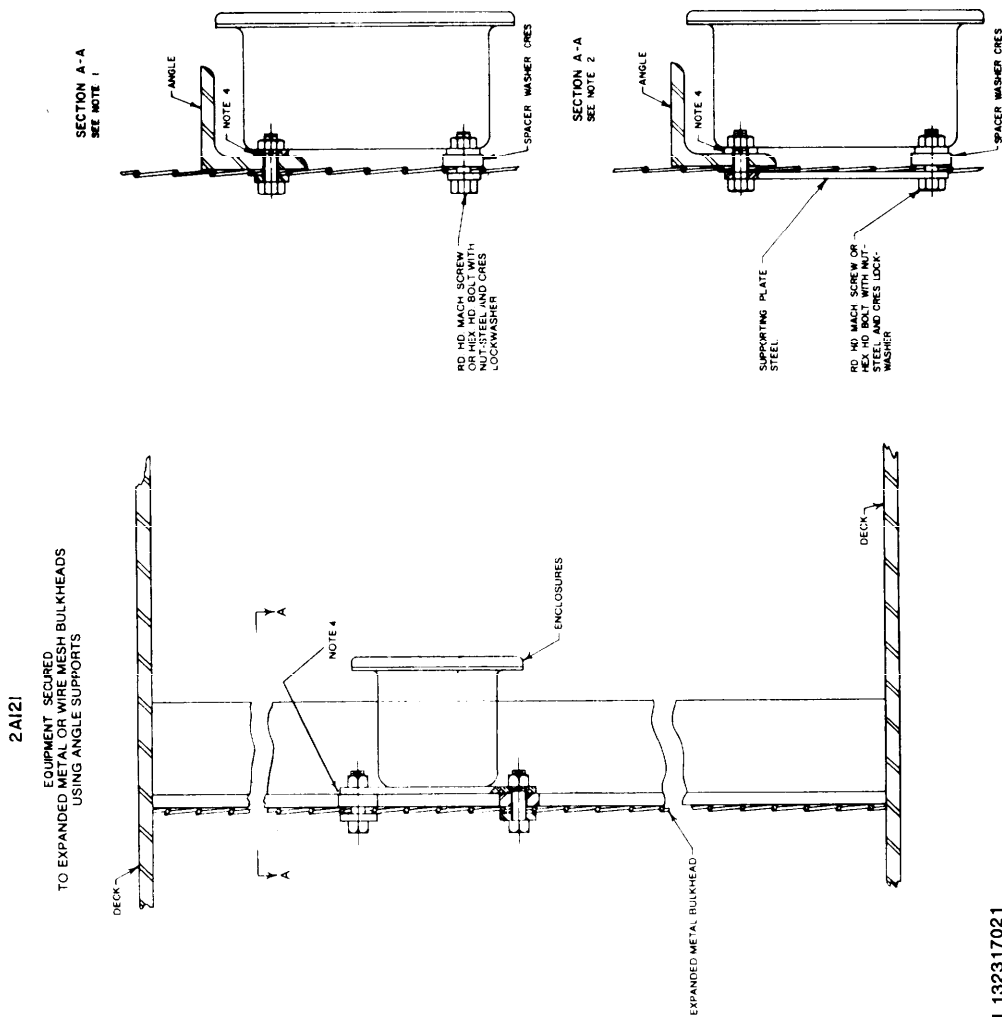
A12. Equipment mounted on expanded metal or wire mesh bulkheads.
